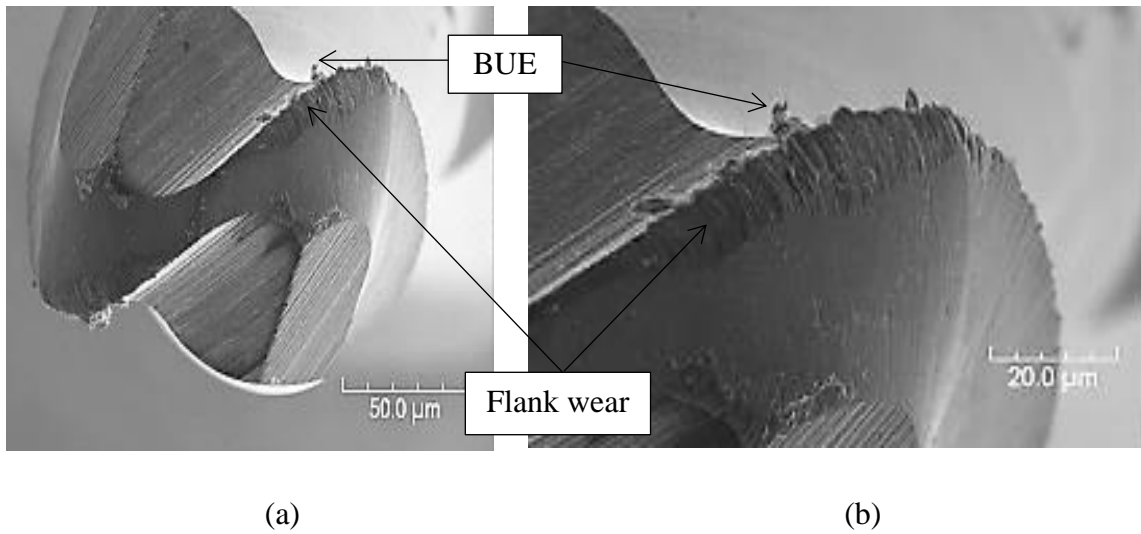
SEM Image of Uncoated  $\text{Ø}152\mu\text{m}$  Ball End Mill,  $V=24\text{m/min}$ ,  $ft=0.2\mu\text{m/tooth}$ , MQL, after Machining 12 mm on 304 Stainless Steel and 12 mm on 316L Stainless Steel: (a) Cutting End of the Mill; (b) Cutting Edge.
